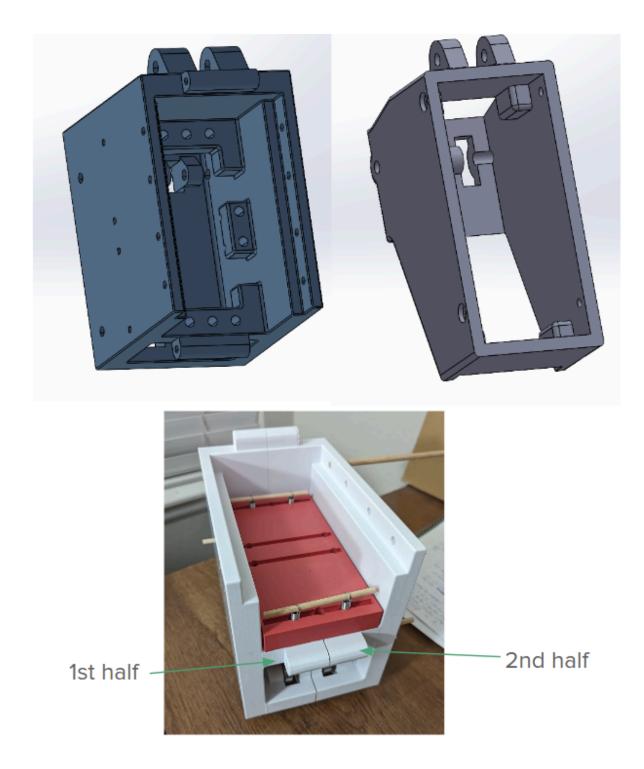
Initial shell design (top left), final shell design (top right), and shell and slider prototype with tension springs and dowels (bottom)
